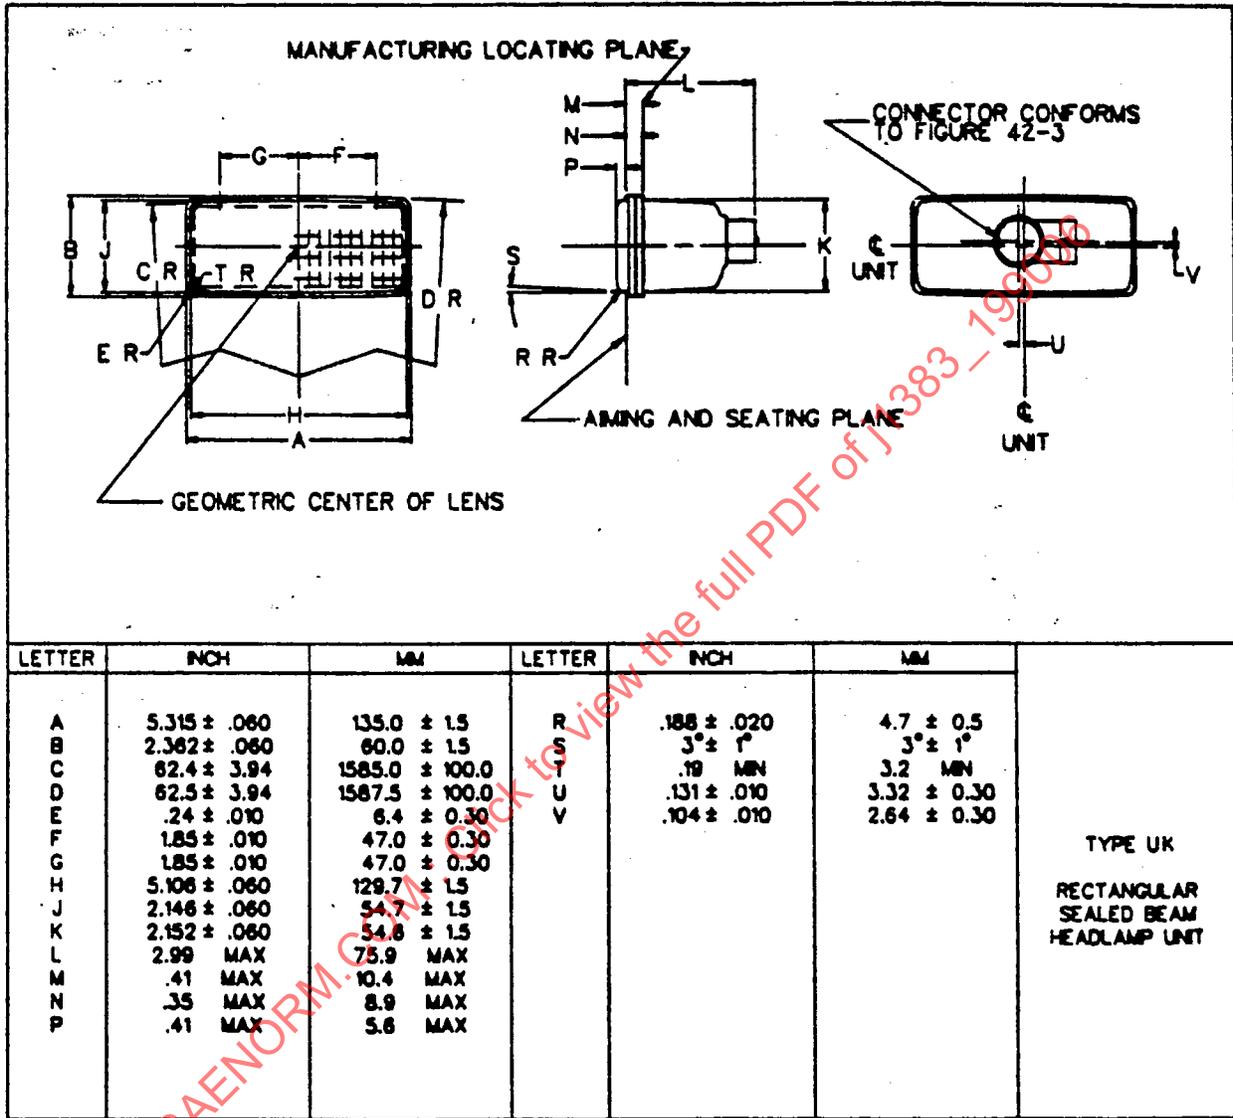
TYPE UK RECTANGULAR SEALED BEAM HEADLAMP UNIT
